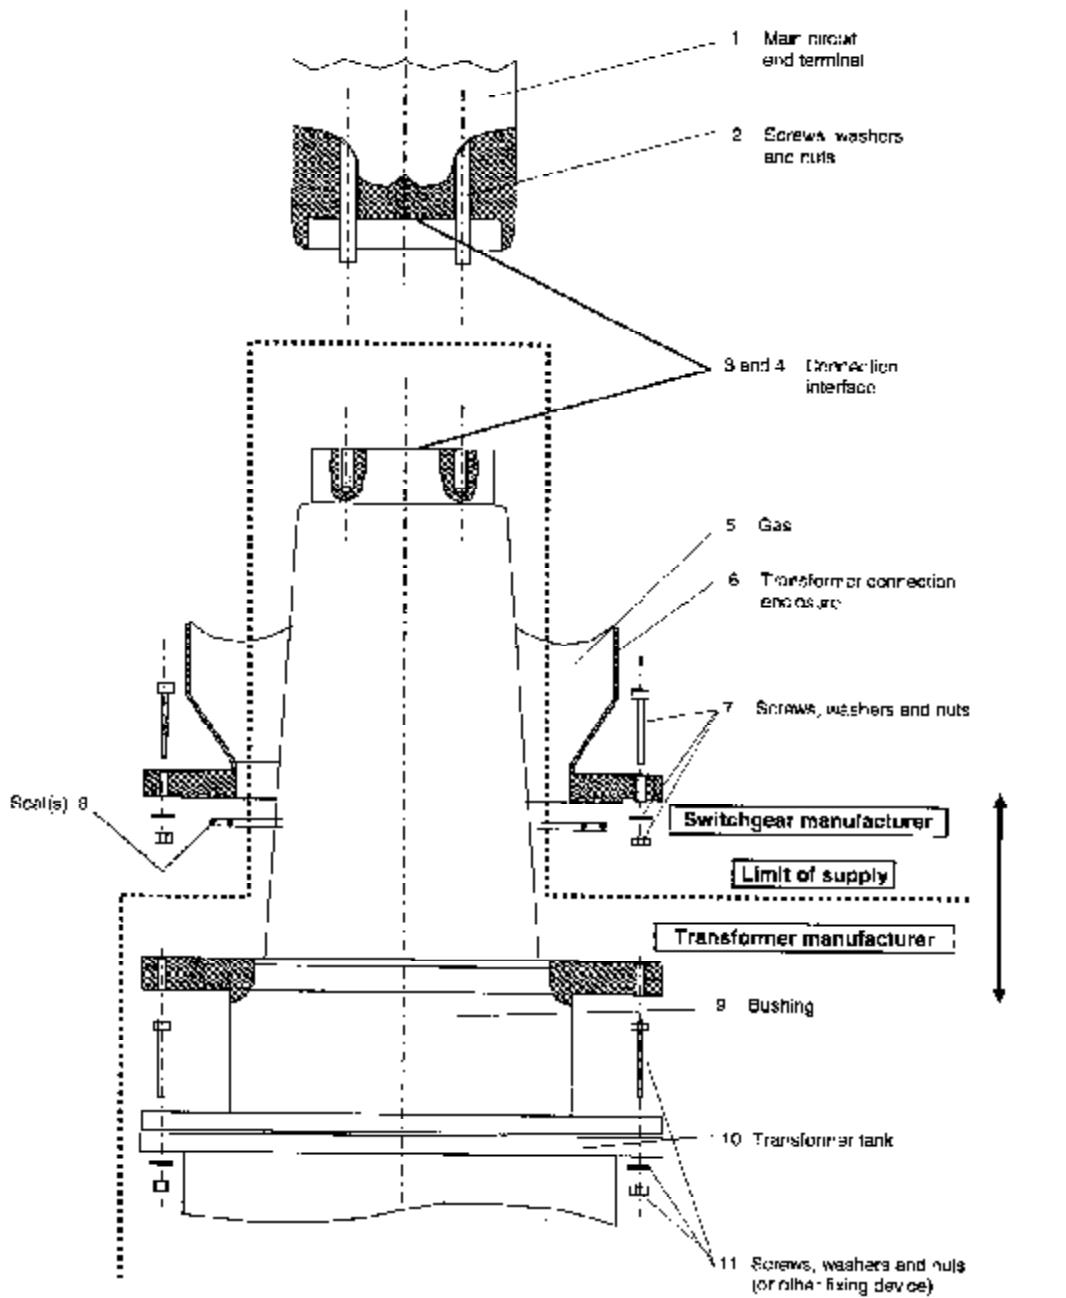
Typical direct connection between power transformer and gas-insulated metal-enclosed switchgear
